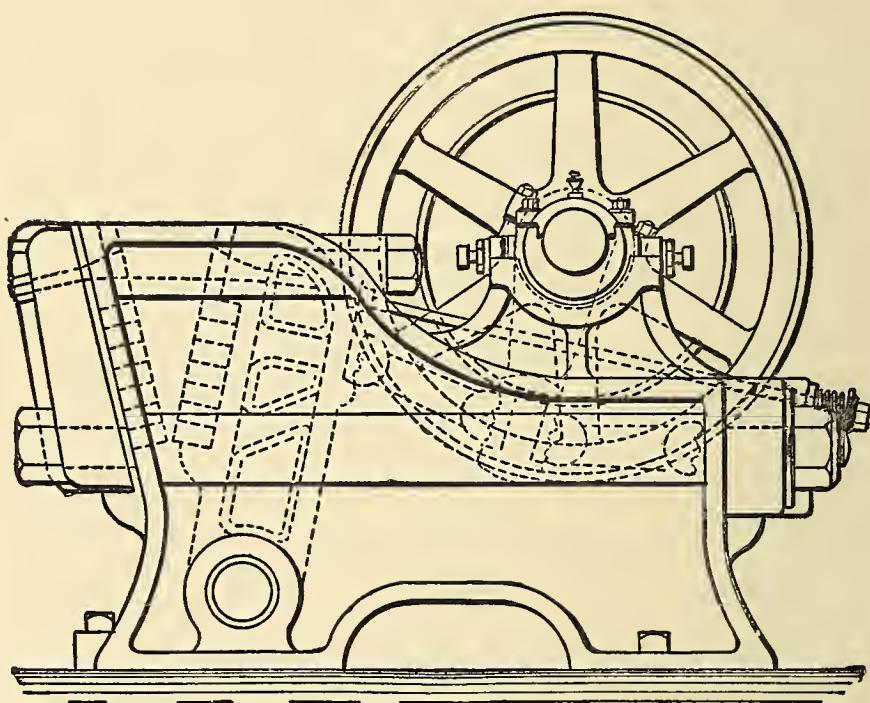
KROM'S IMPROVED SECTIONAL ROCK-BREAKER.
